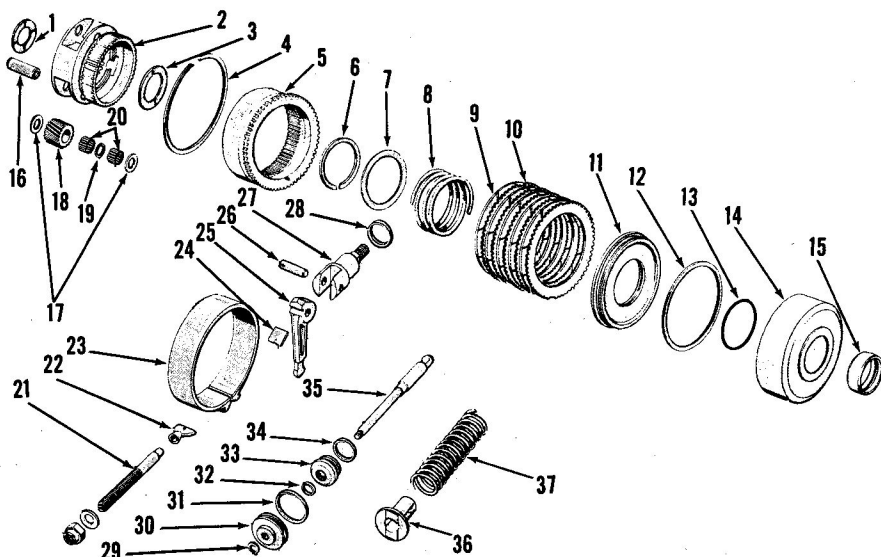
Exploded view of "B" carrier, No. 1 clutch, No. 2 band and related parts. Bushing (15) and planetary gear assembly (items 16 through 20) are not available separately.
